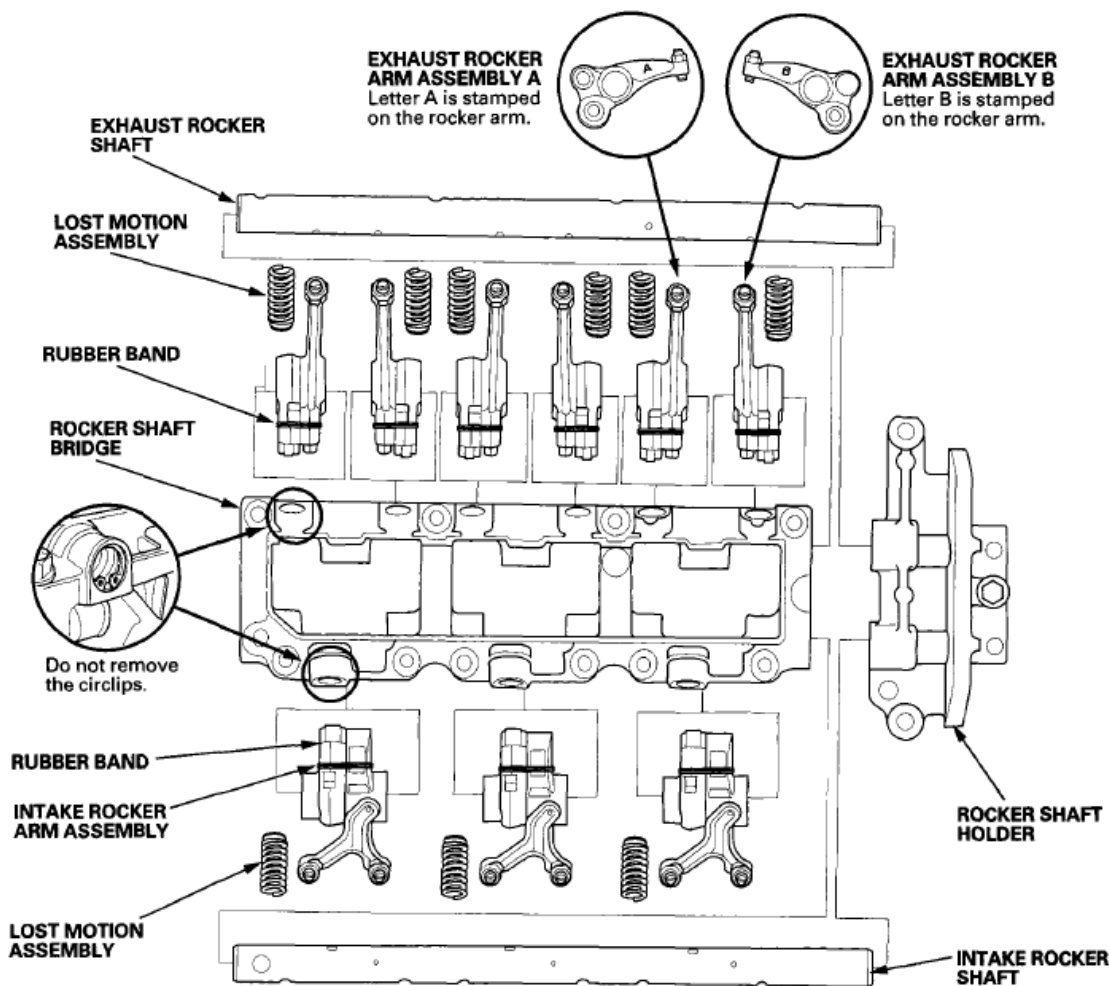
Identifying Rocker Arm And Shaft Components Location - Rear
